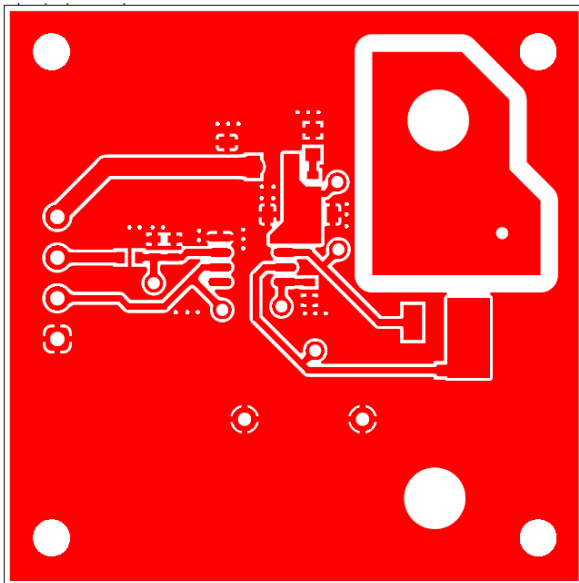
FAD1101AEVB PCB Internal Plane 1 Drawing
